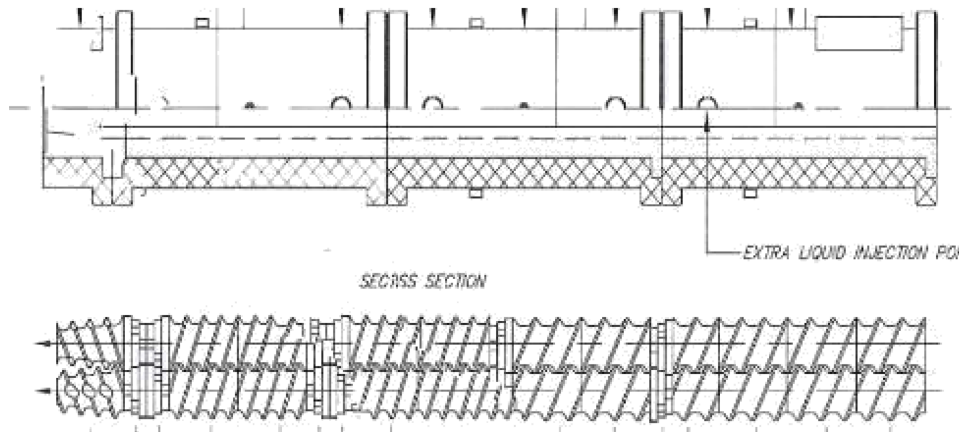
Screw configuration of pilot plant twin screw extruder.
